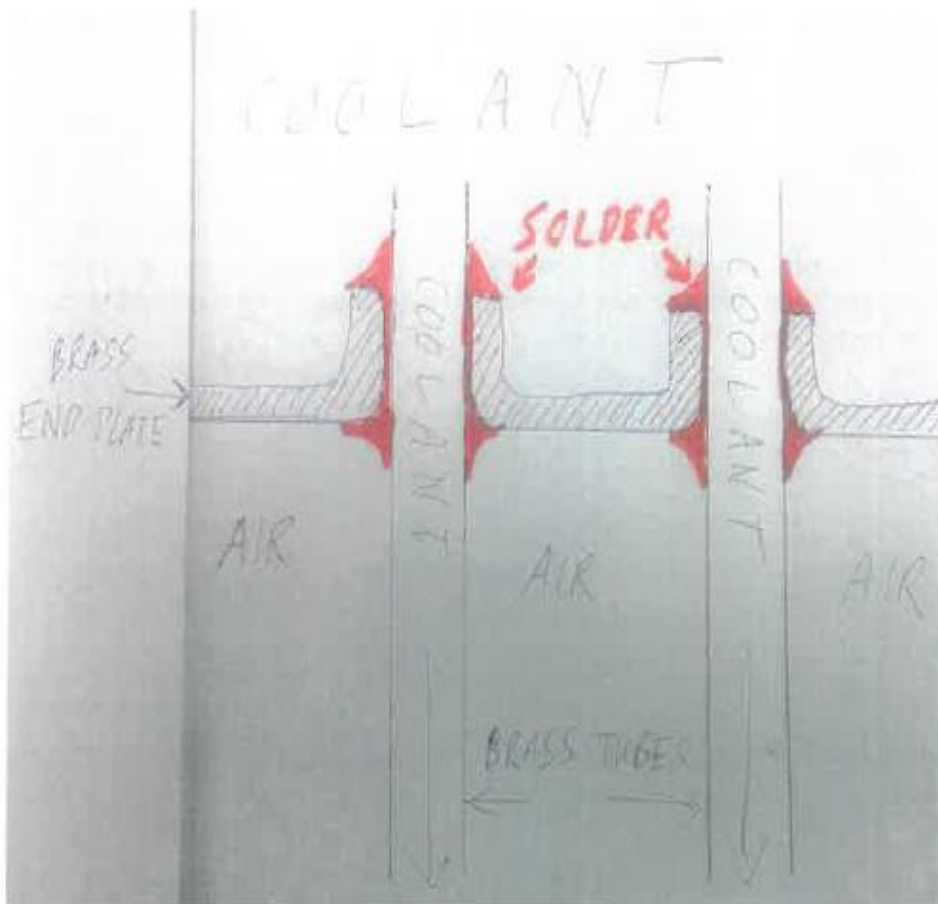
Sketch showing how the tube/plate joints would be configured, ideally.
